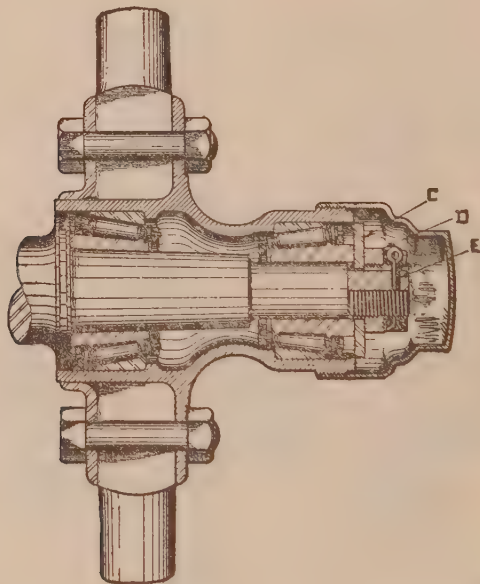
Roller bearings as mounted on front hub of the Franklin car. They should be adjusted so that the wheels turn freely, but without side play. After adjusting, the cotter pin is inserted in the hole. The washer, C, goes on before the nut, D, to keep the latter from turning; it accomplishes this by means of a keyway in the spindle.
